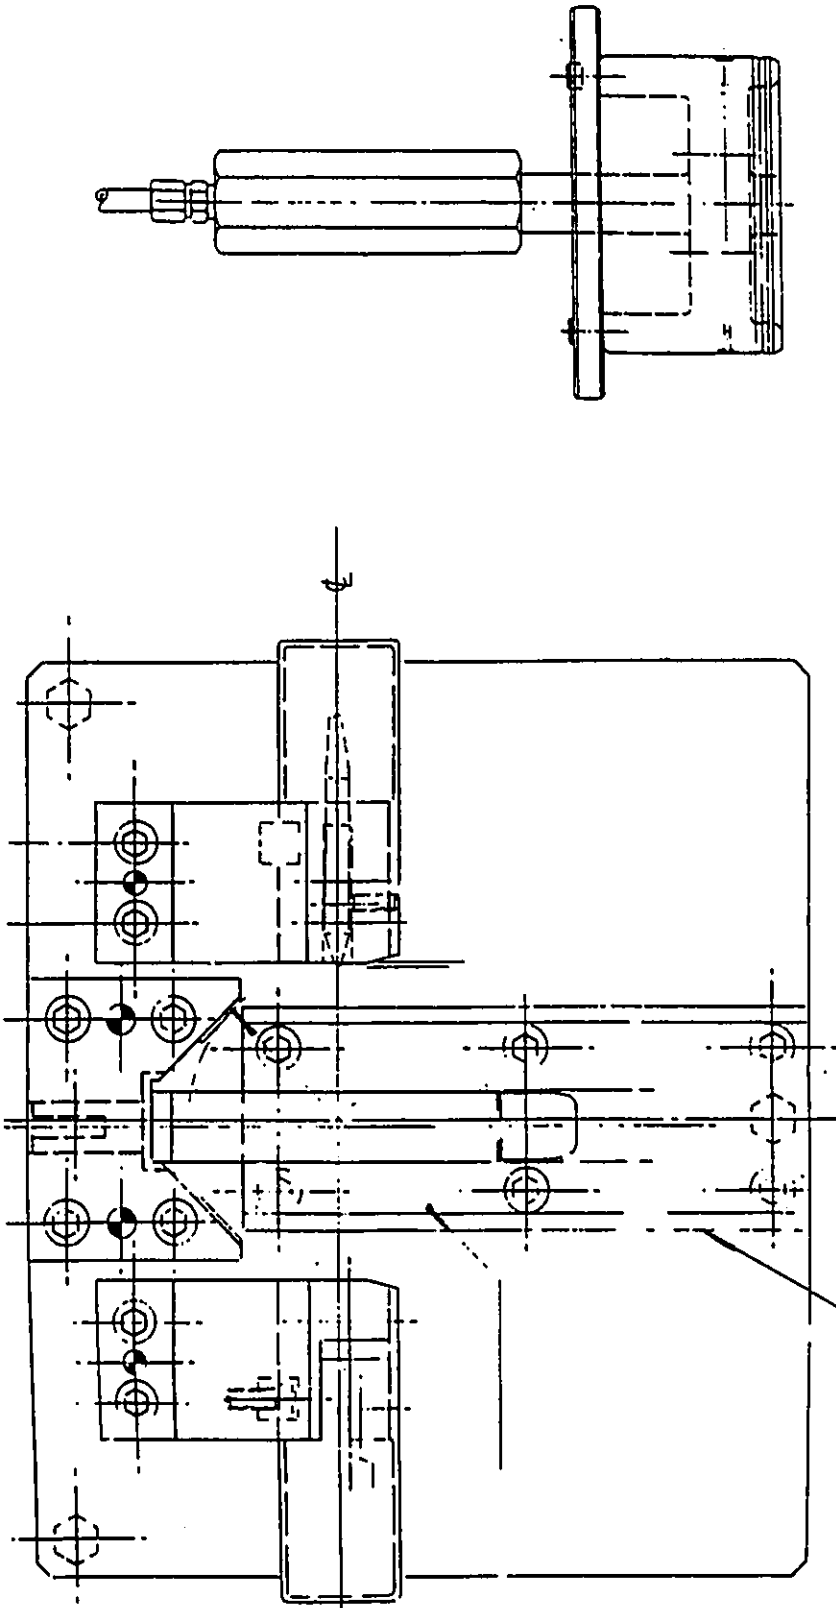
Gages Used for Measuring Piston to Bore Clearance
